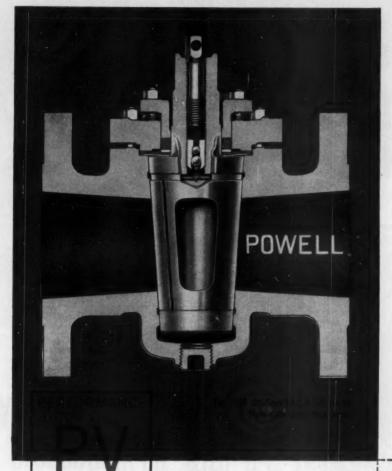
G—150-pound Steel Lubricated Plug Valve. Gear operated
